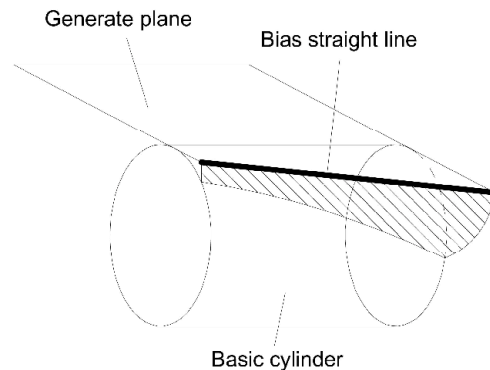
The tooth flank formation mechanism of helical cylindrical gear.
